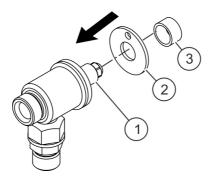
Slide insulating sleeve and insulating washer over the seal screw
